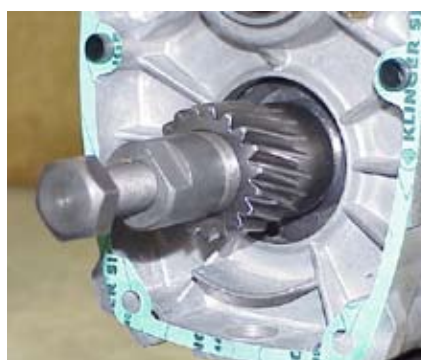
The drive gear can be removed easily with the #276-808 puller shown here.
